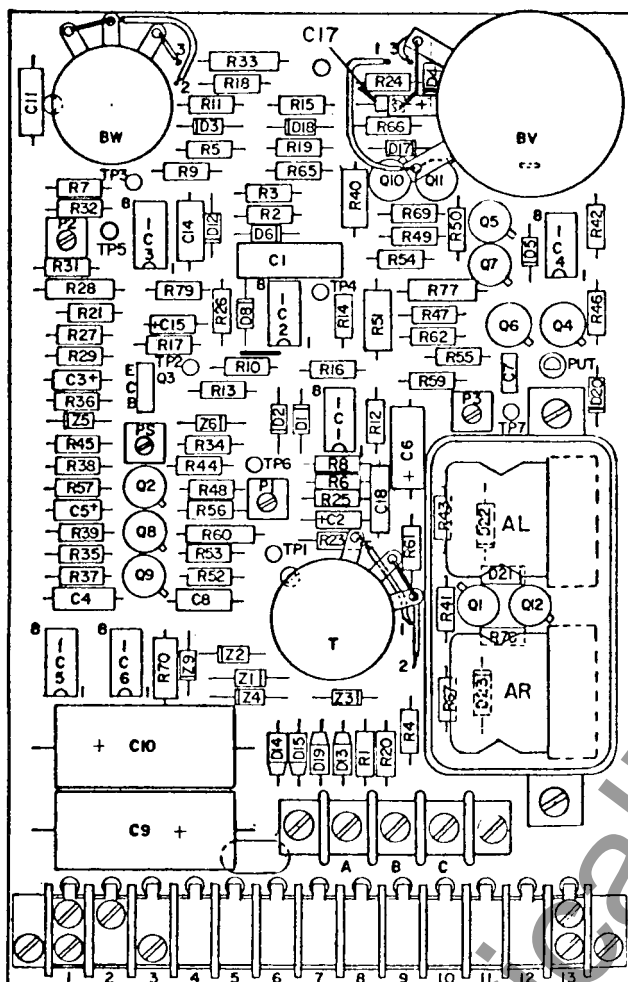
Type SVR Relay Printed Circuit Component Location.
